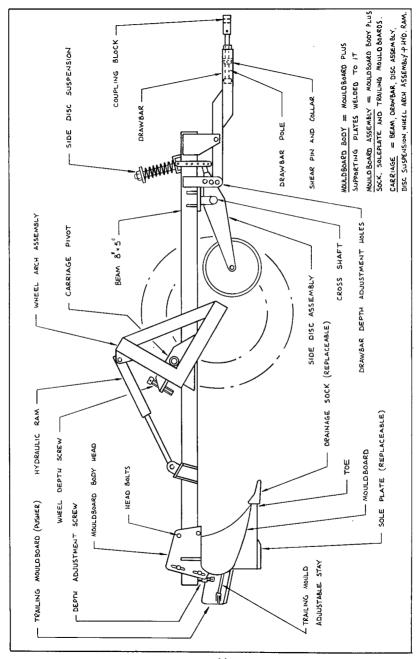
Components of standard forest plough carriage and D60/—/t mouldboard assembly.
